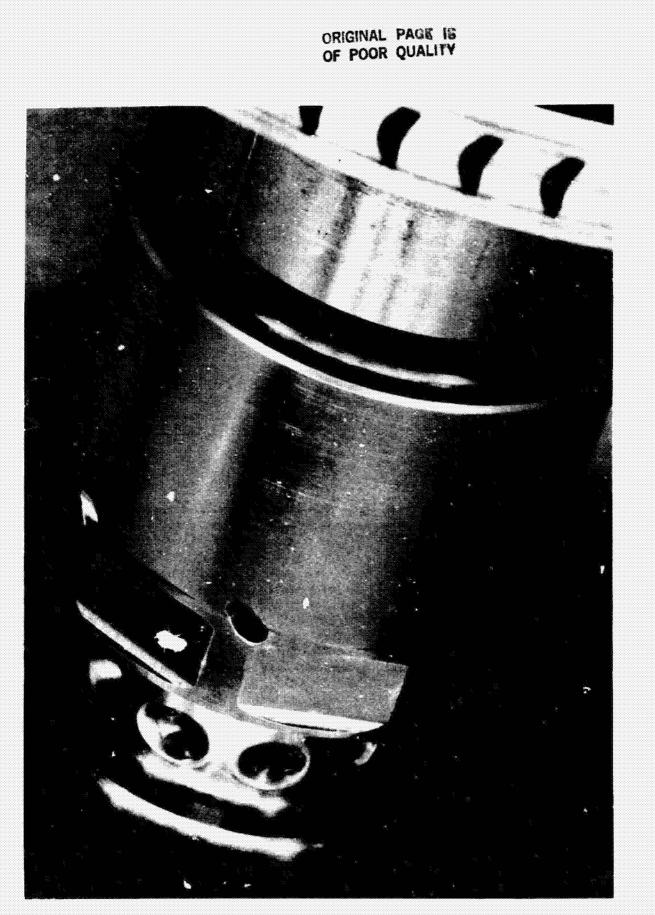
Turbine-end Bearing Cartridge Mounted on Rotor Assembly
